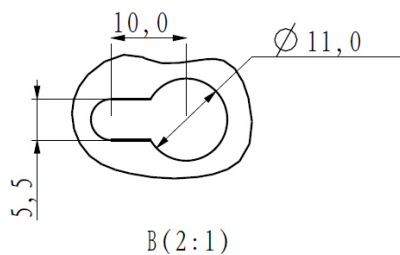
Detail for keyhole (bracket for cabinet mounting)
